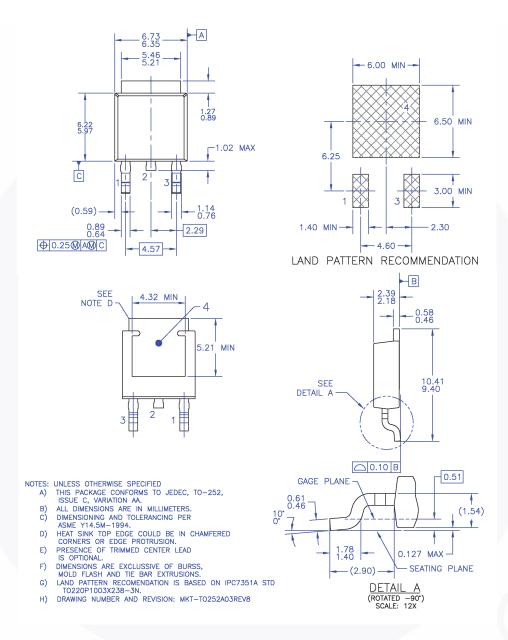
TO252 (D-PAK), Molded, 3-Lead, Option AA&AB
